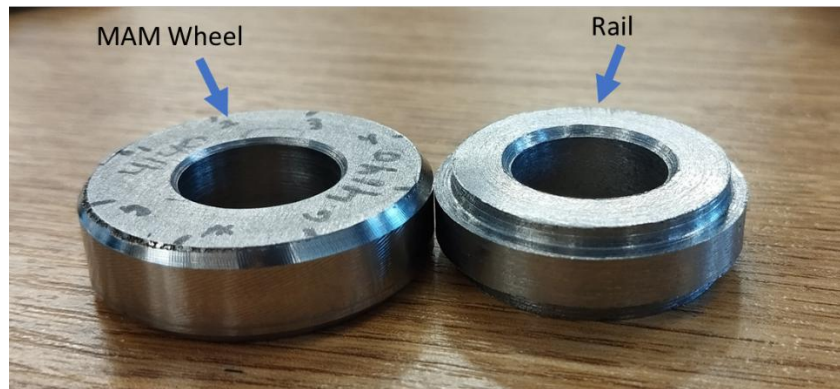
Wheel disc manufactured by MAM, and conventional rail disc
